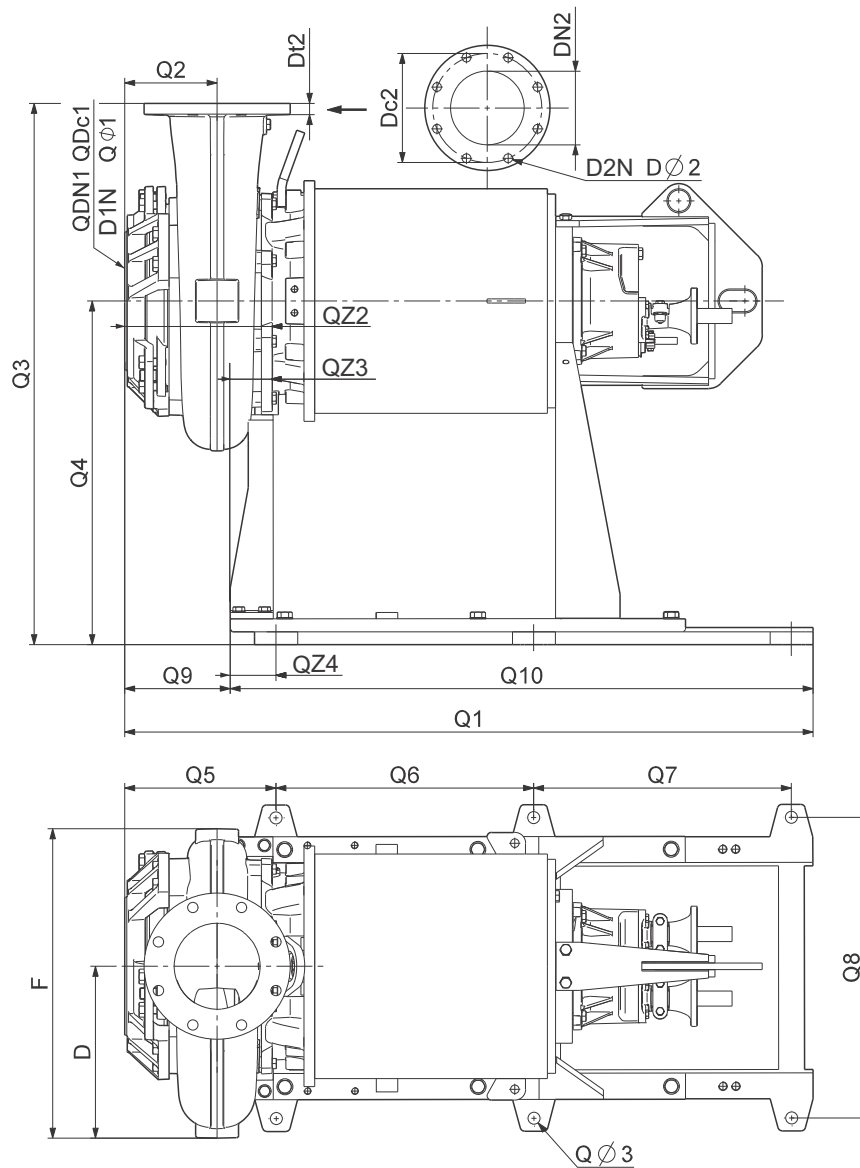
Dimensional sketches, dry, horizontal installation on bracket
